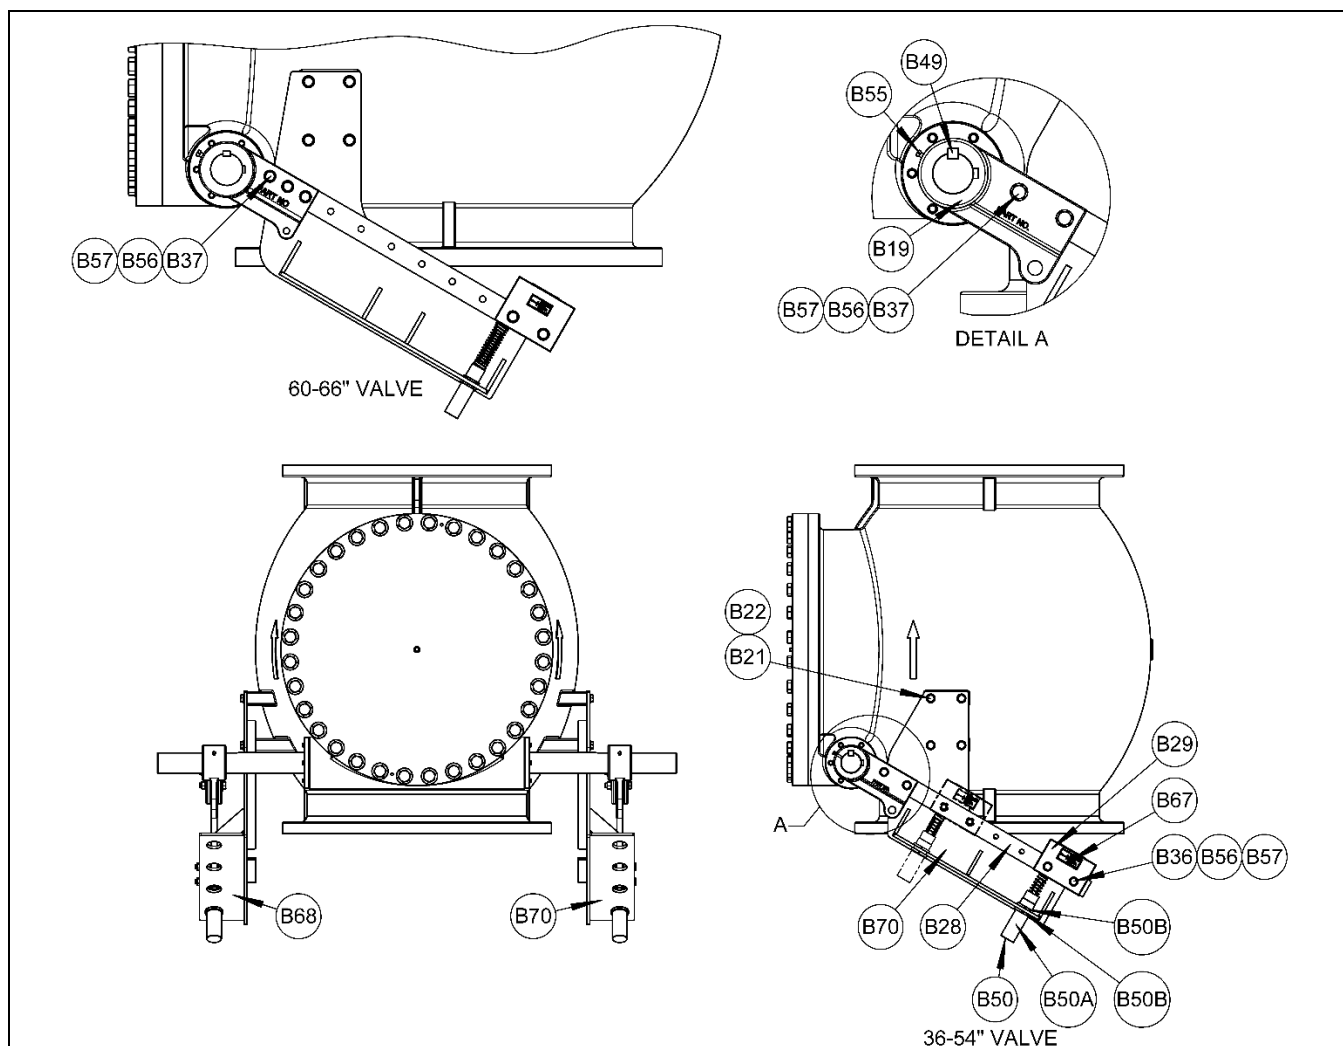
Lever & Weight with Oil Cushion (OB) Assembly 36-66" – Vertical Installation
